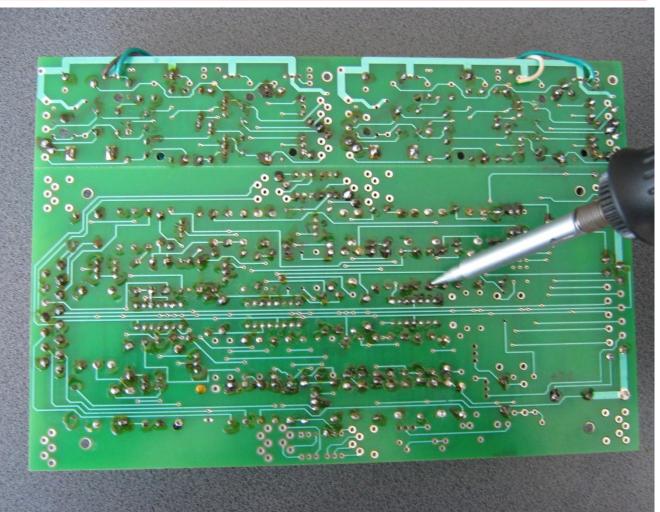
Soldering of terminal pads on the component side of a PCB of an experimental supply source
